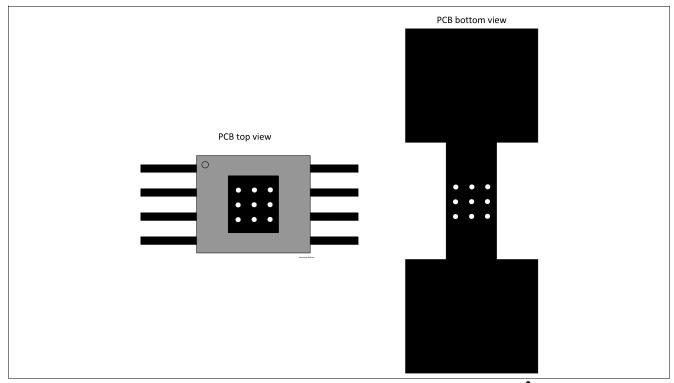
PC Board Top and Bottom View for Thermal Simulation with 600 mm² Cooling Area
